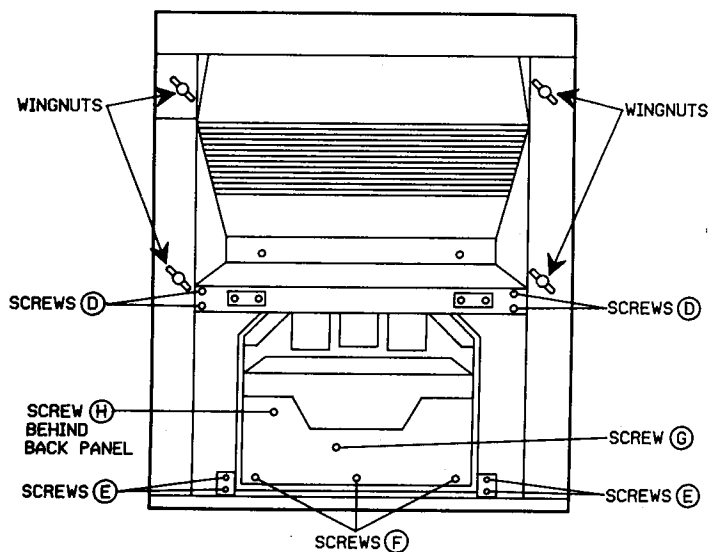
Cabinet Rear View (Back Cover Removed)
